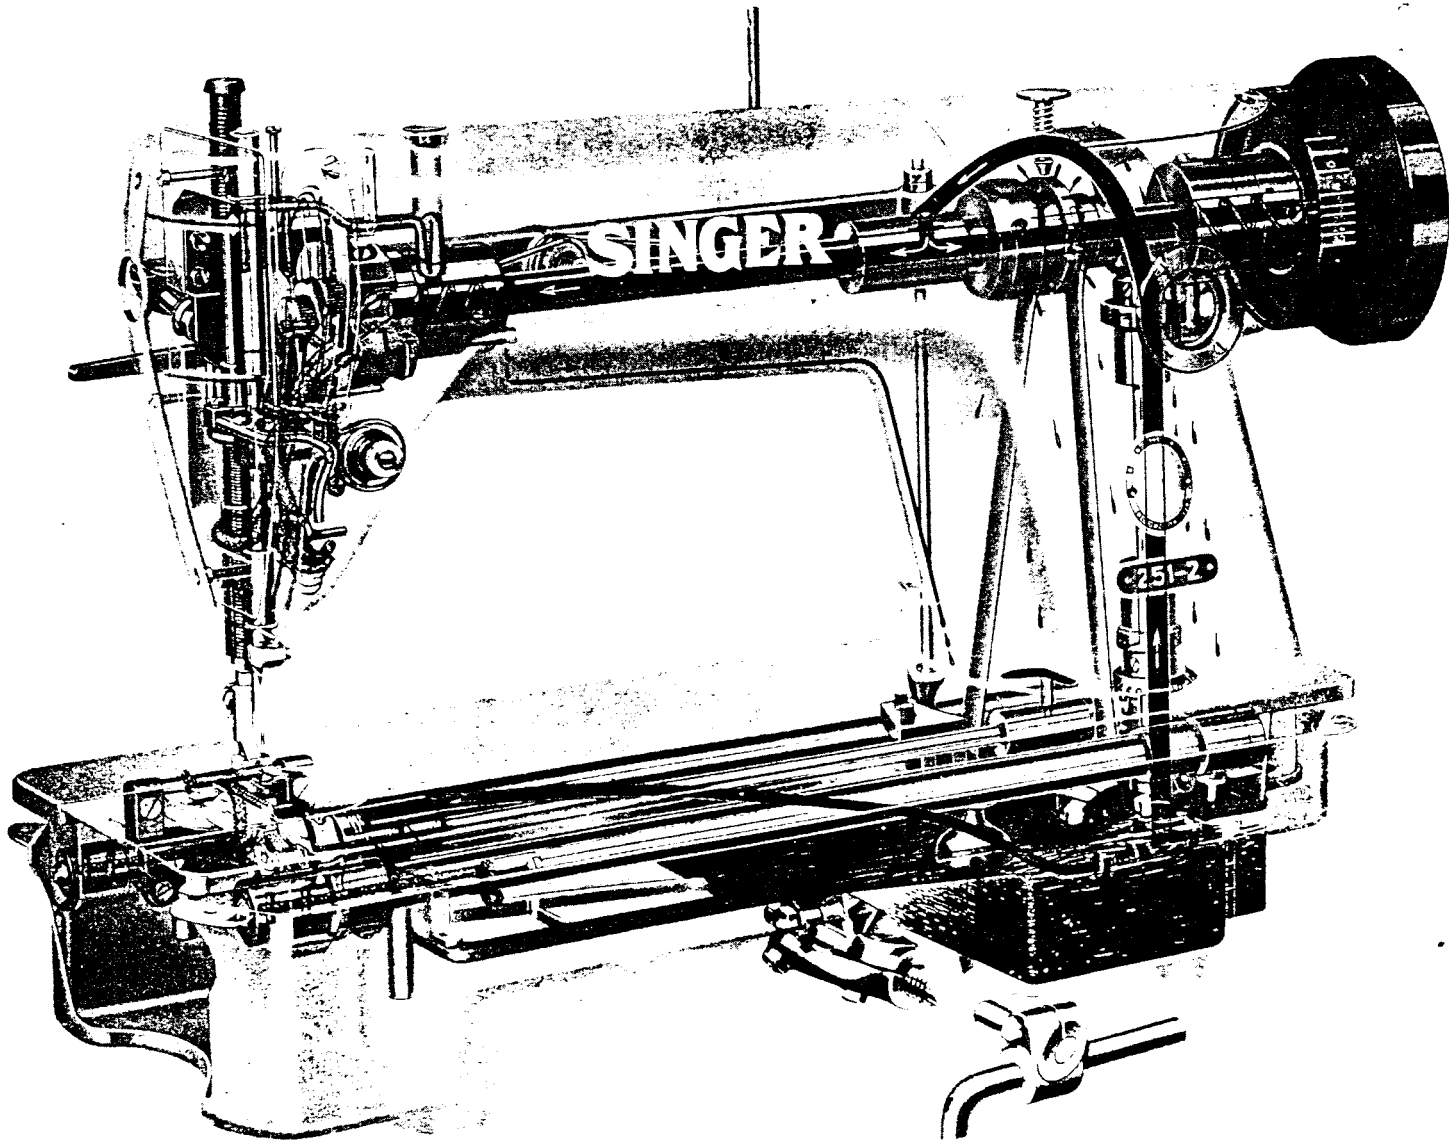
X-RAY VIEW OF MACHINES OF CLASS 251
